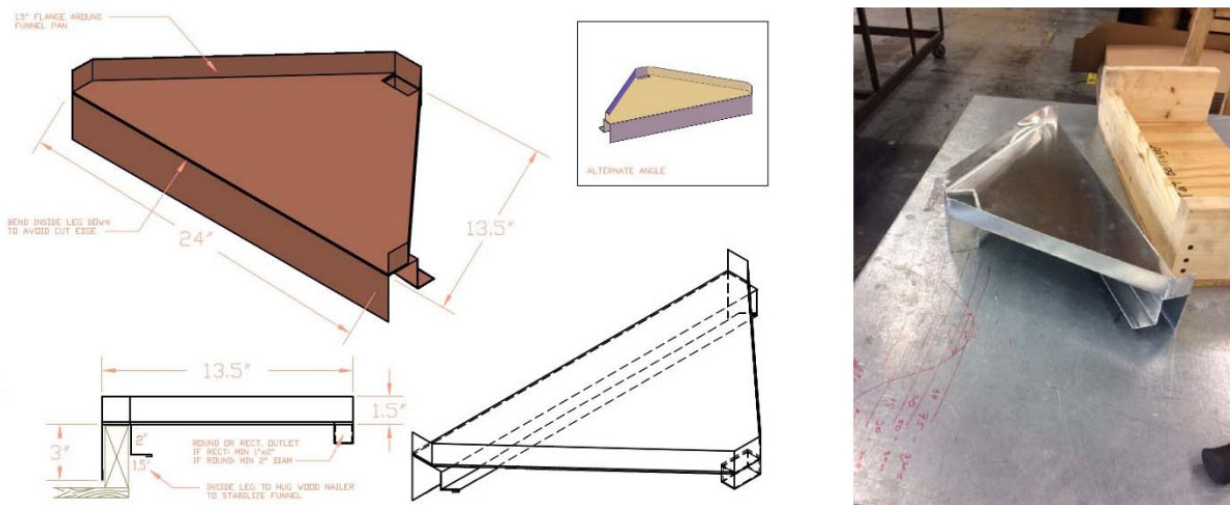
Concept Design Sketch and Completed (Built) Version of Rainfall Test Apparatus, Photo and sketch by Patrick Bollinger
